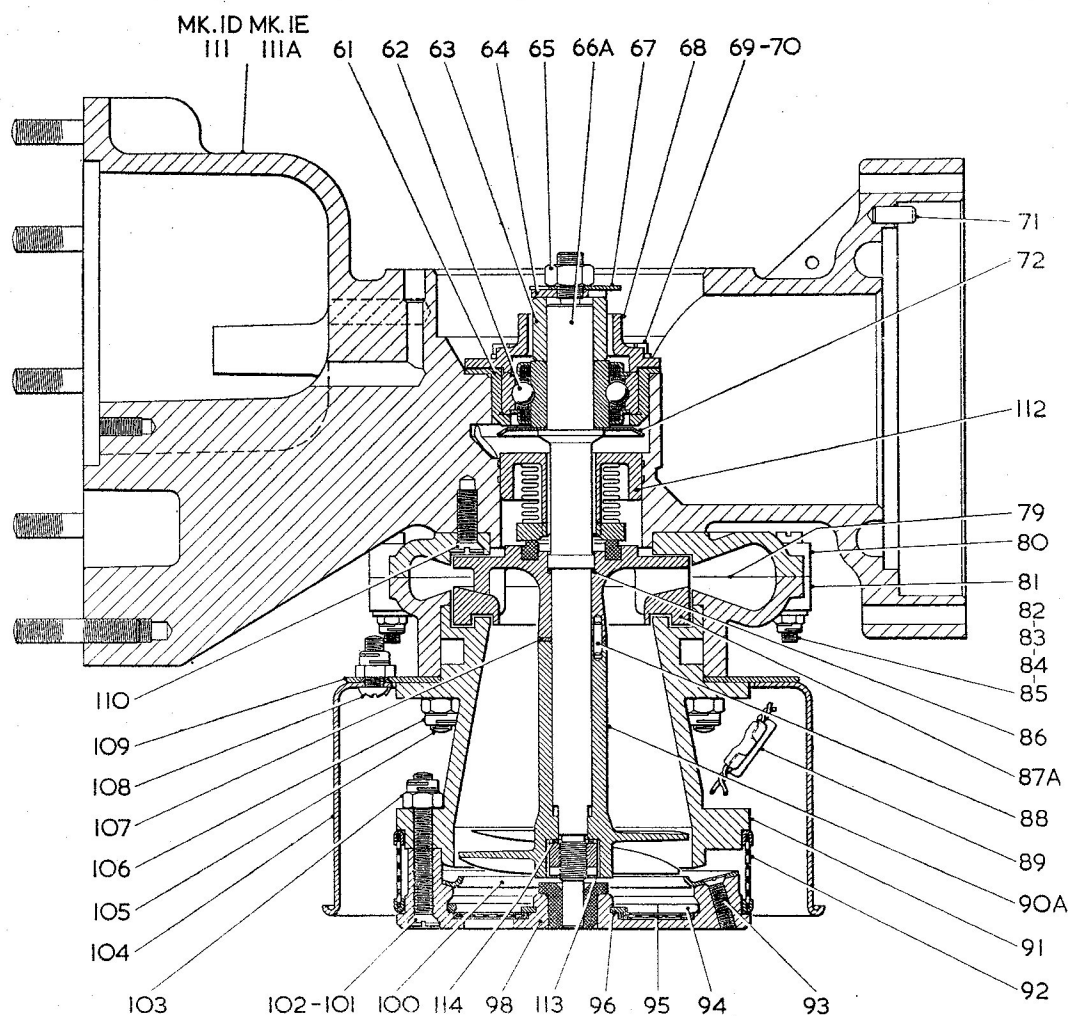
Sectional view of pump assembly (SPE. 404 Mk. 1D and 1E)
